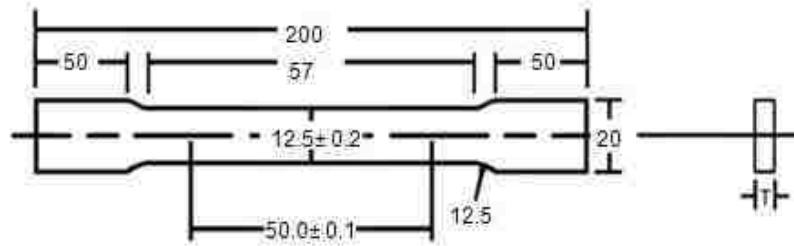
ASTM E8 standard sheet type specimen (dimensions in mm)
